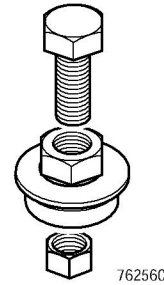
892/01155 Fuel Injection Pump Gear Removal Tool
